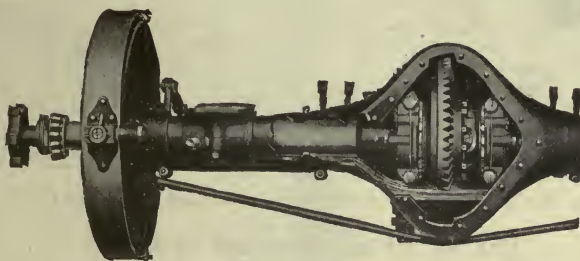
Method of opening up axle for inspection and adjustment of the bevel gear.
